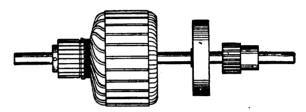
Motor Armature, Commutator, Brake Wheel and Pinion, Mounted on Shaft, Outside Connected Signal.
